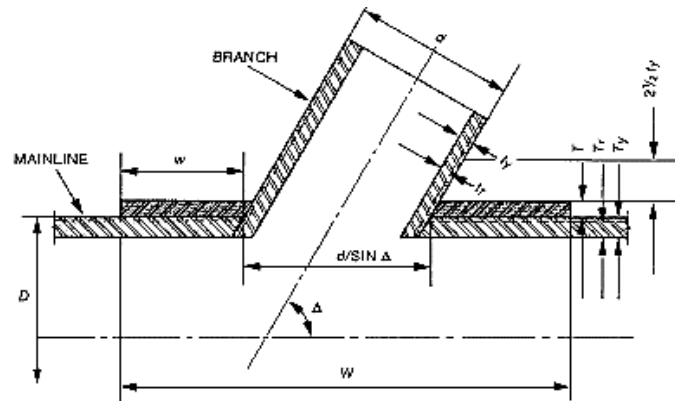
Openings reinforcement in welded steel tubes [15]
